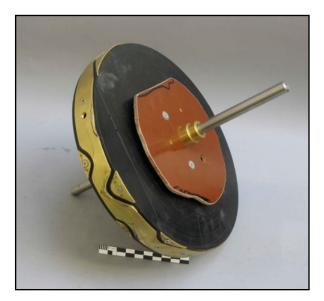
Delrin[®] cam body with Zig-Zag cam and lower neck lever cam in place.
